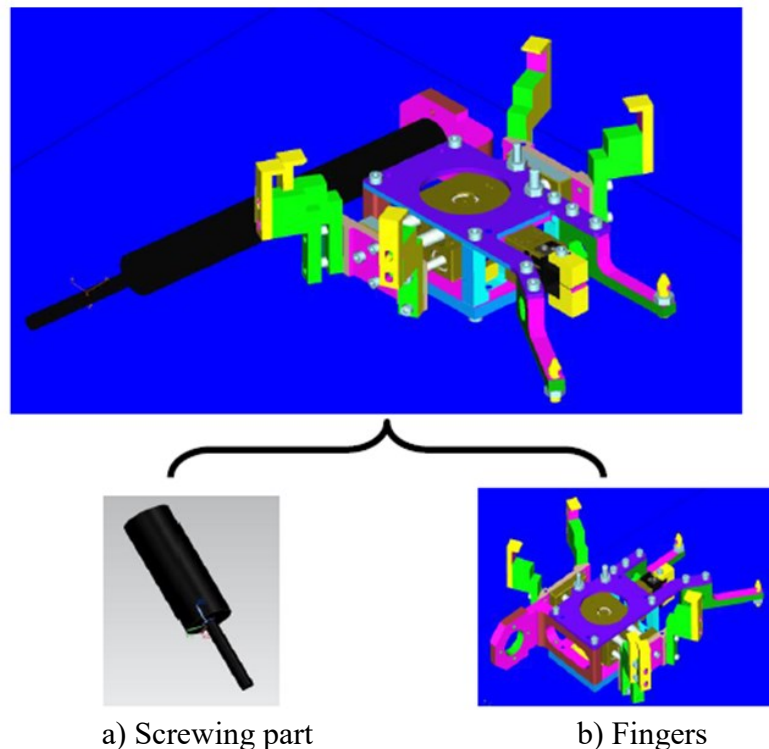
CAD model of the gripper. a) Screwing part- b) Fingers
